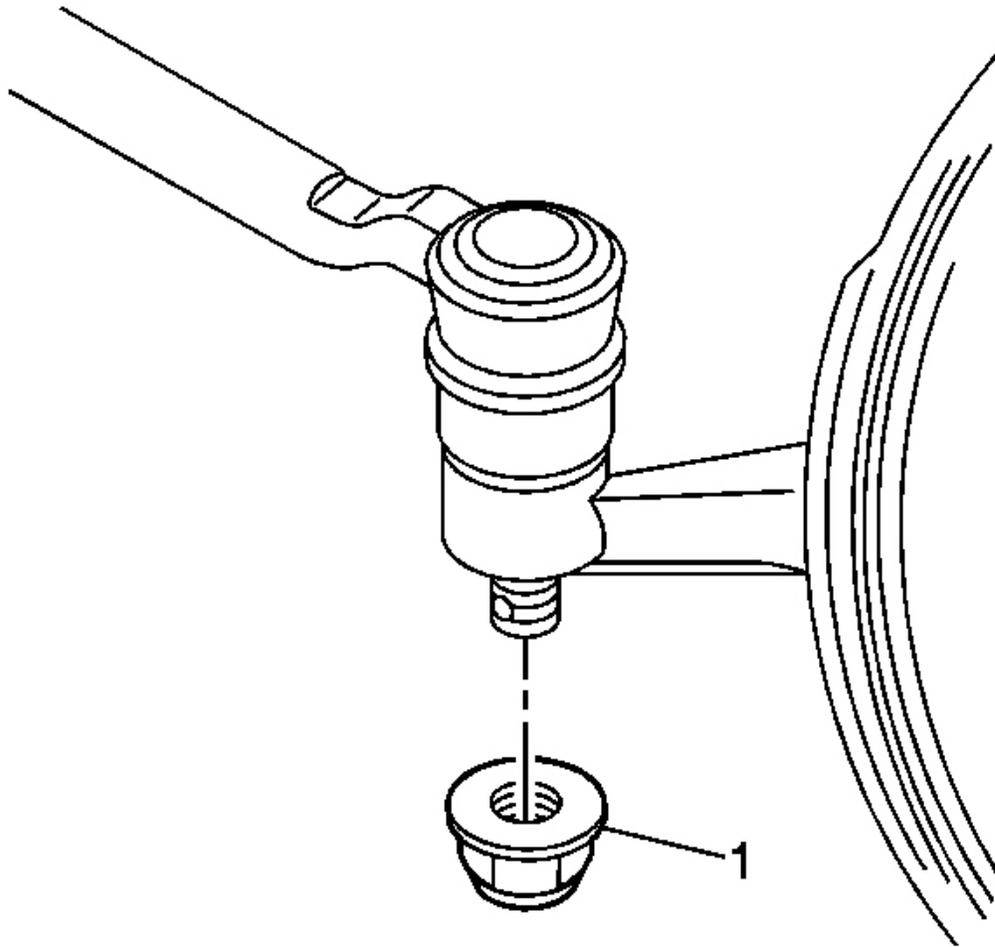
Identifying Steering Linkage Outer Tie Rod Nut
